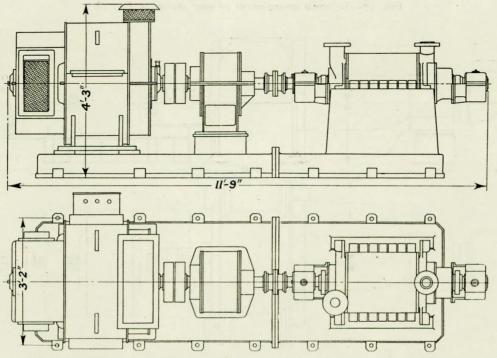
h.p. marine motor driven pump with 1,000/4,000 r.p.m. epicyclic gear
